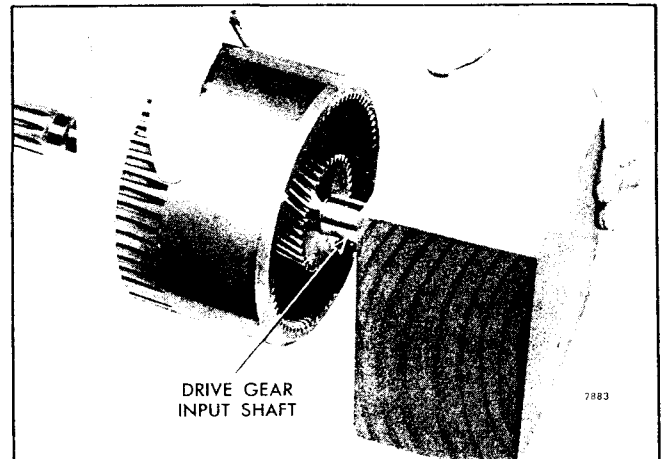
Placing Wood Block over End of Drive Gear Shaft
